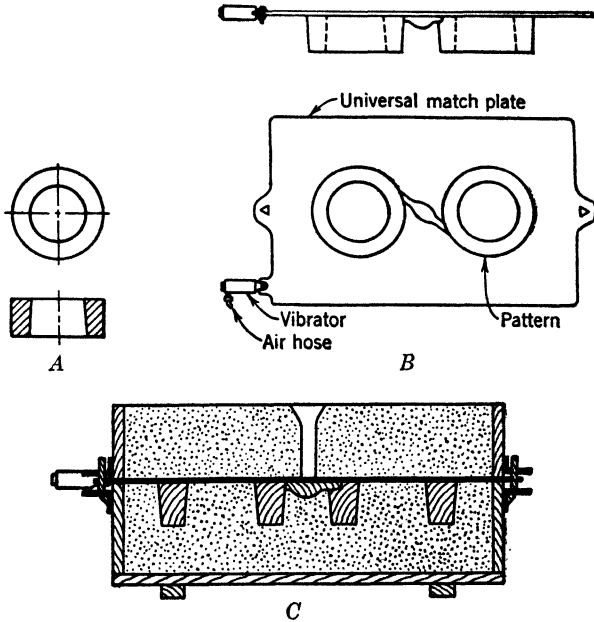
A. Pattern. B. Universal match plate with pattern and vibrator attached. C. Sectional view, before cope is drawn.
